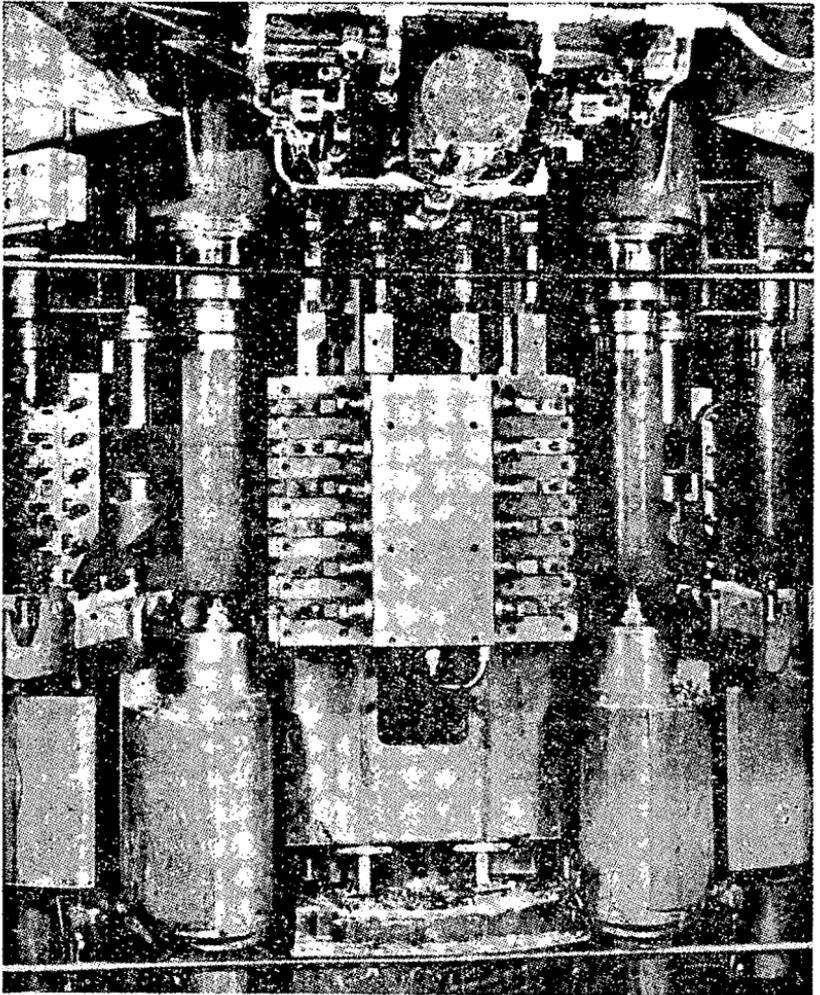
Close-up view of tooling of a Barnes four-station center-column machine used for rough turning the forgings.
